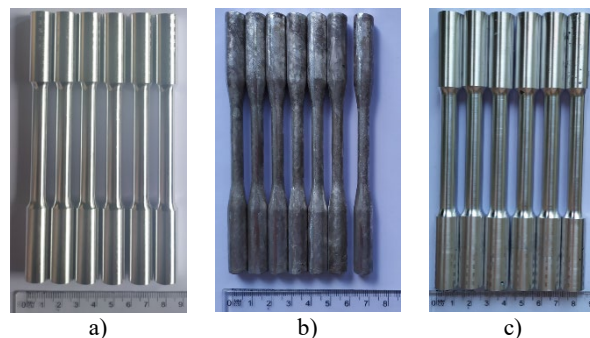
Samples of the WE43 alloy: a) ingots, b) HPDC castings, c) mold (steel mold) castings
